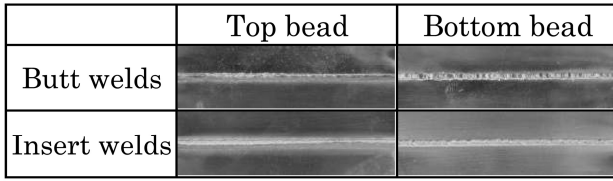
Bead appearance of butt welds and pure Ni insert-type welds.
